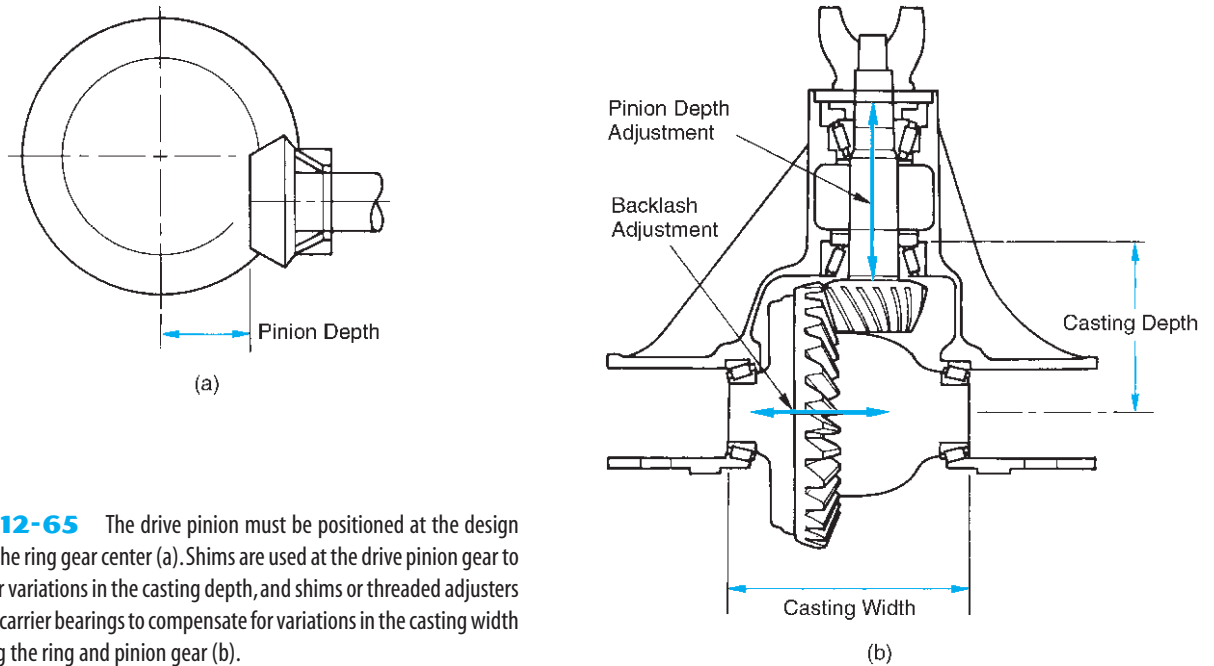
The drive pinion must be positioned at the design distance from the ring gear center (a). Shims are used at the drive pinion gear to compensate for variations in the casting depth, and shims or threaded adjusters are used at the carrier bearings to compensate for variations in the casting width when adjusting the ring and pinion gear (b).
